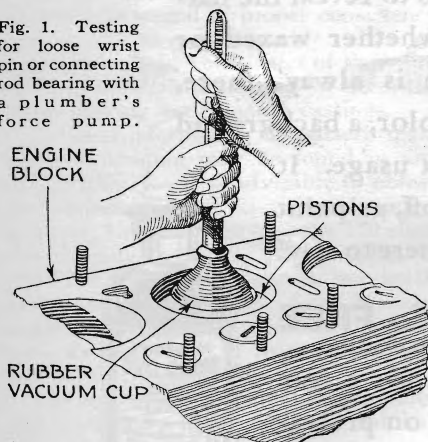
Any appreciable motion indicates that either the wrist pin or connecting rod bearing is loose, and perhaps both.
